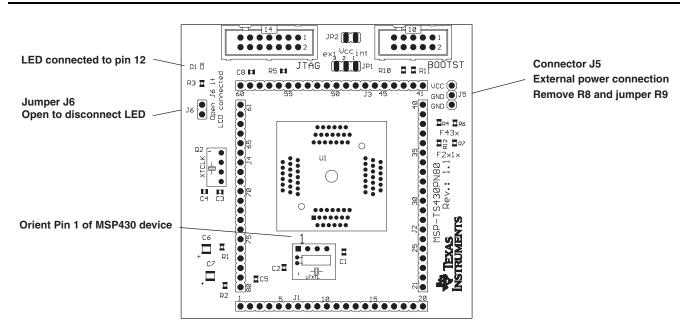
MSP-TS430PN80 Target Socket Module, PCB
